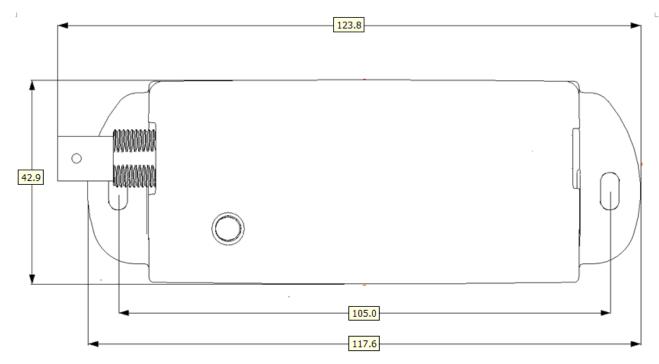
LDSBus Dissolved Oxygen Sensor Adapter Dimension - Top View
